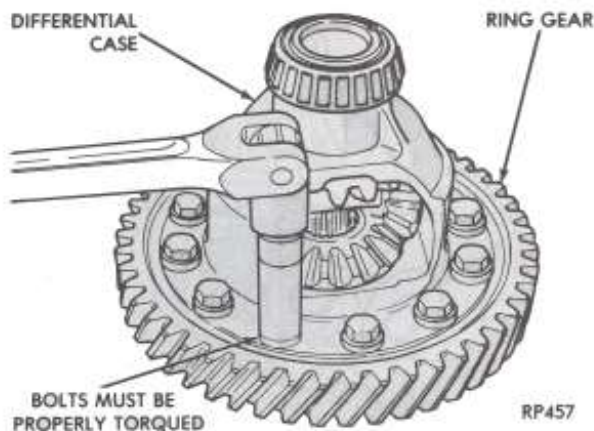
Remove or Install Ring Gear Bolts and Ring Gear
